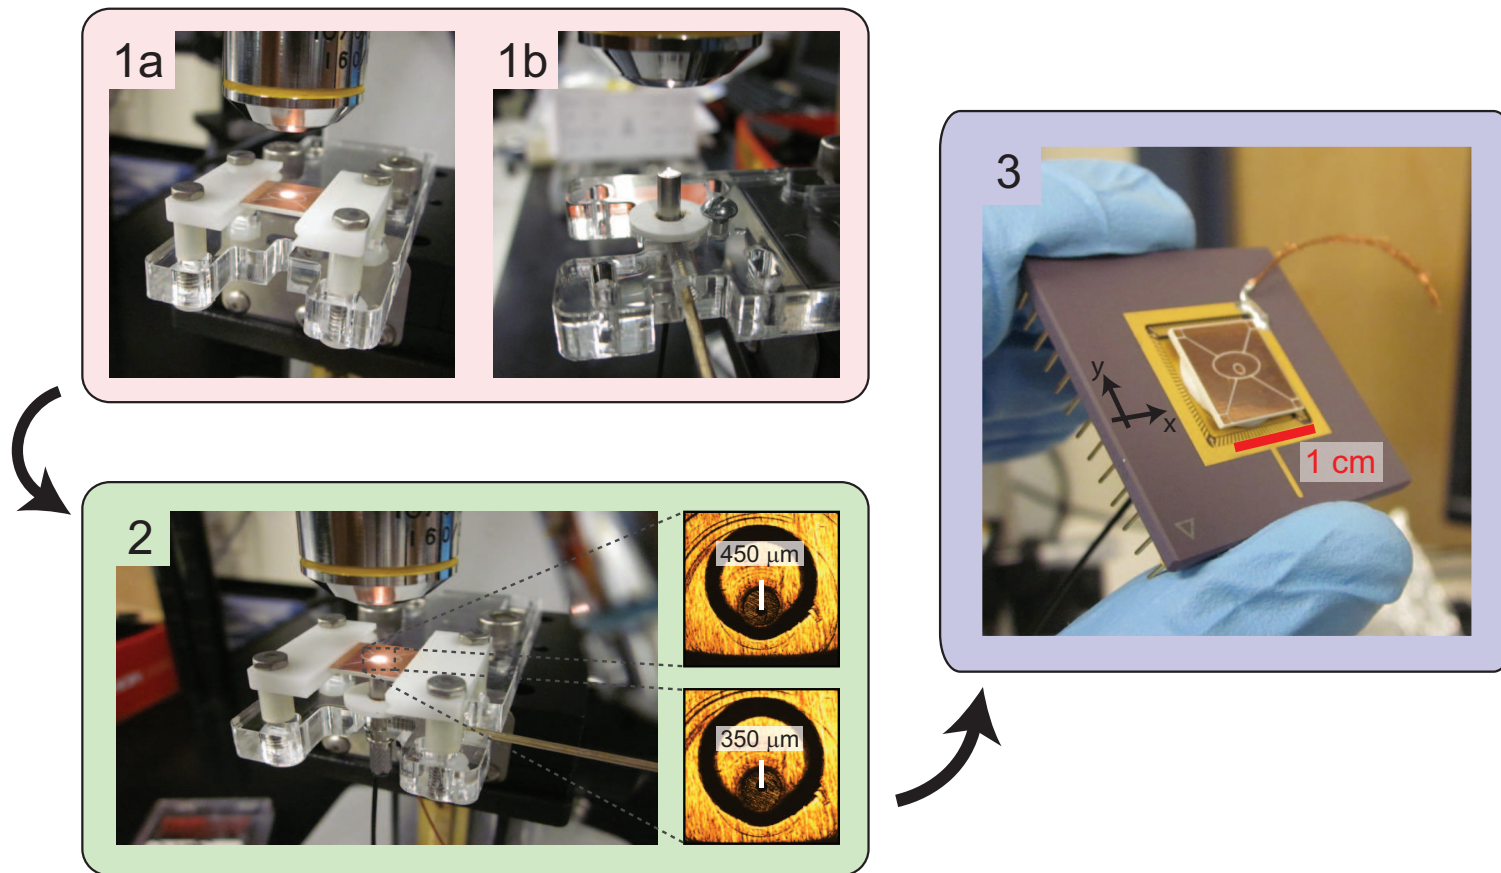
Illustration of the PCB-ferrule attachment process. The scale is given by the dimensions of the PCB, which is 1 cm \times 1 cm. (1a) The PCB is firmly held in place in the grooves of two elevated grabber pieces. (1b) The ferrule is rigidly held in place by a setscrew from the side. A ceramic washer is fit over the ferrule, which serves as a spacer in the final assembly. (2) With the ferrule inserted in the PCB via, both components are secured independently. By loosening the ferrule setscrew, the ferrule can be rotated. The microscope pictures show two orientations of the ferrule, where the fiber hole is aligned to the minor-axis of the trap but with a different fiber-center offset due to the nonconcentricity of the nipple. Once the desired orientation is achieved, the ferrule setscrew is applied. The entire structure can now be rigidly detached from the microscope stage, so that cyanoacrylate adhesive may be conveniently applied. (3) The assembled PCB and ferrule (and washer) are “front-loaded” through a hole in the CPGA chip carrier and glued in place. Subsequently, the PCB pads are wirebonded to the CPGA bonding pads.
